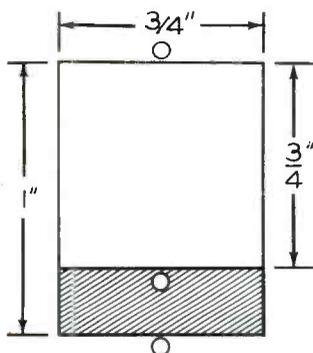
Enlargement of Mounting Hole for New Sound IF Transformer.
